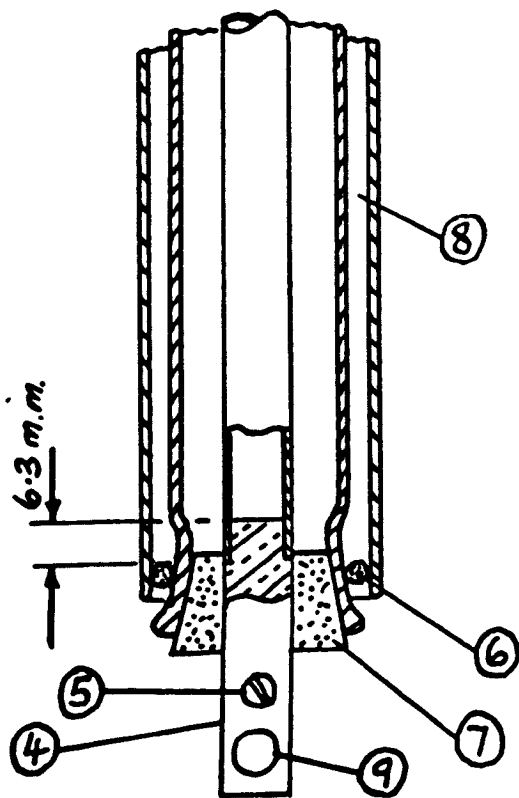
UPPER SURFACE AND INNER ASSEMBLY OF
